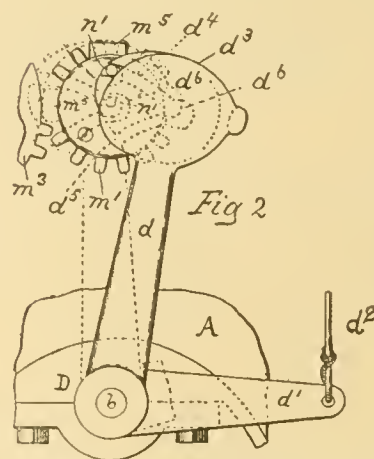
is a top plan view of the mechanism, and Fig. 2 is an
